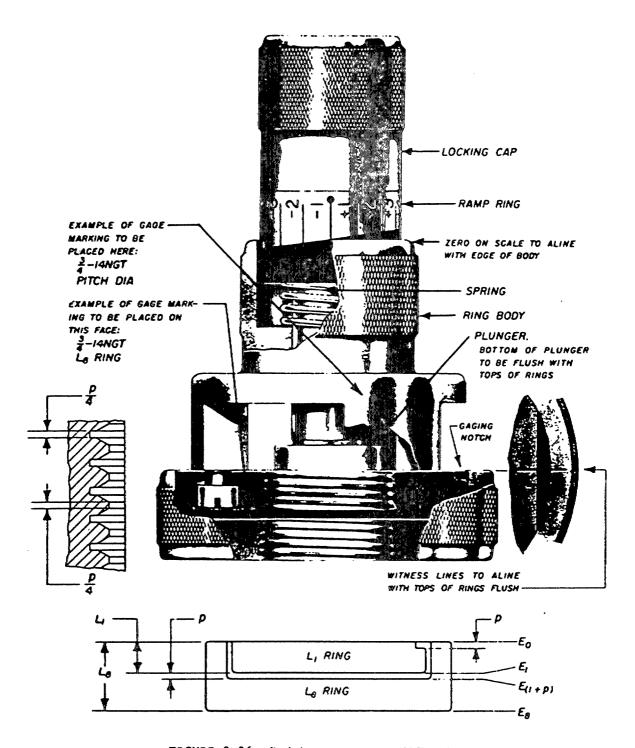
Pitch diameter ring gages NGT, SGT.
